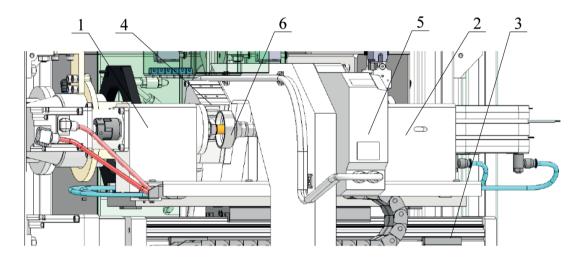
External geometry measurement module: 1 – drive spindle, 2 – holding spindle, 3 – linear servo drive module, 4 – 2D laser head, 5 – optical micrometre, 6 – inspected product
